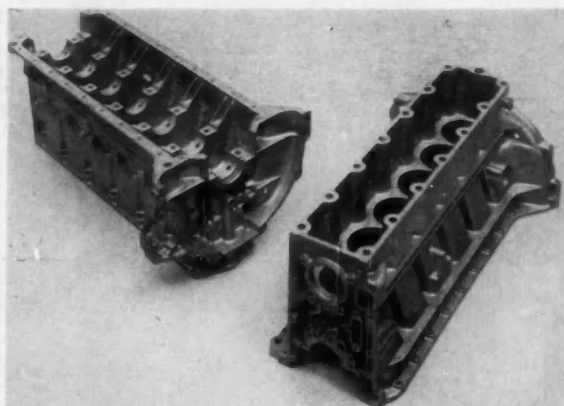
6-cyl engine block in aluminum die casting. Weight 43 lb.
